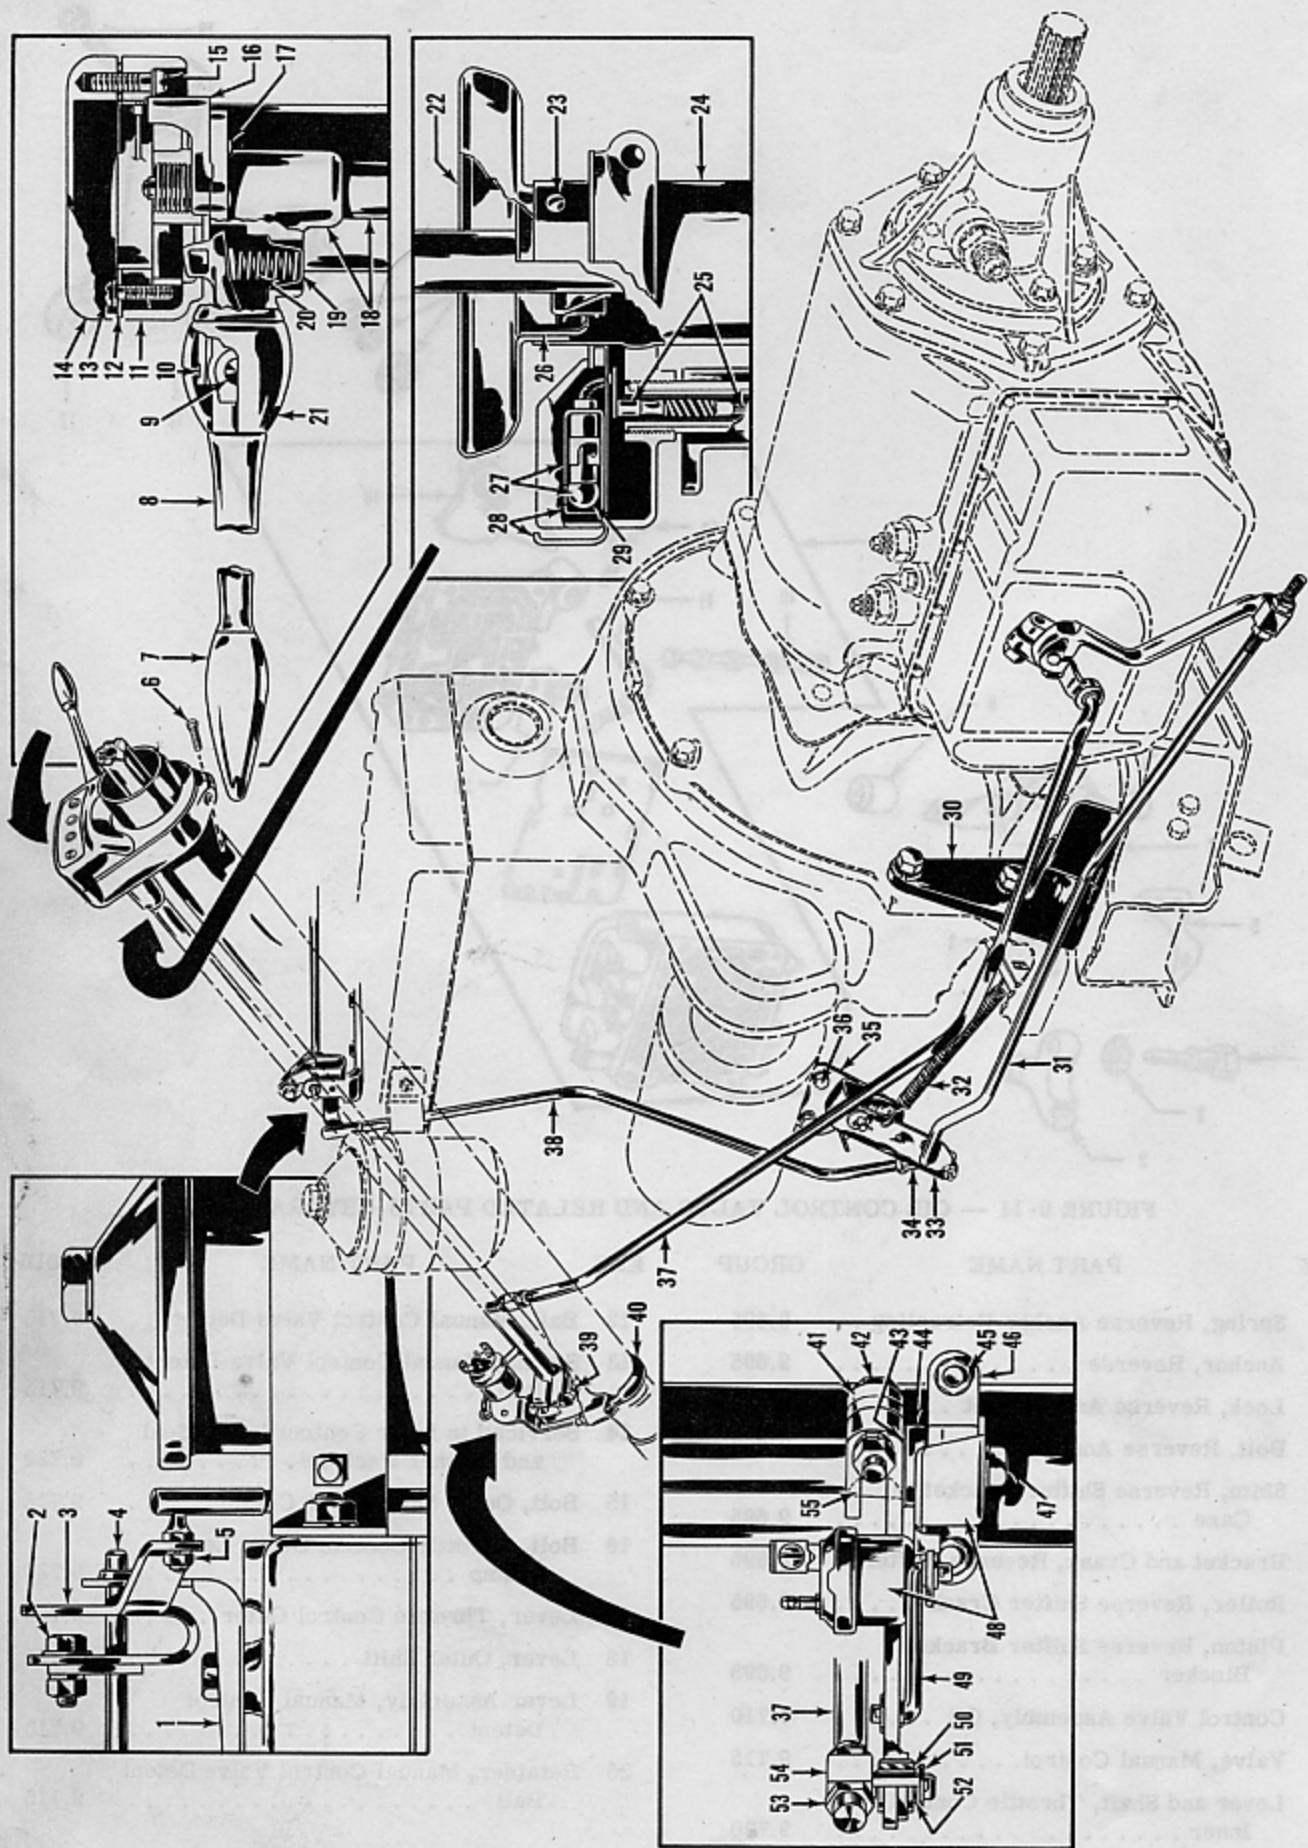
GEAR SHIFT AND THROTTLE CONTROLS - HYDRA-MATIC
